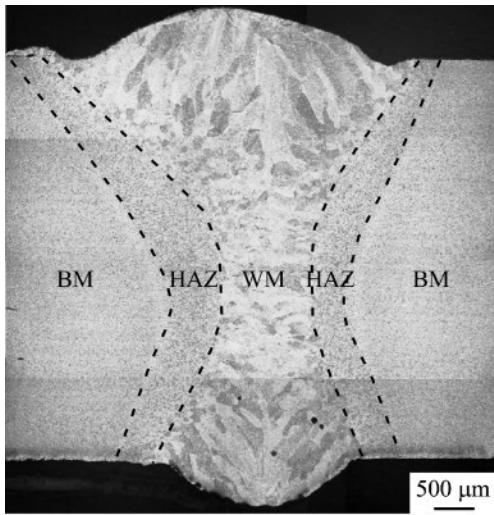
Macrostructure of fully-penetrated welded joint of 5 mm thick Ti-6Al-4V titanium alloy by single-pass hybrid welding at 10 kW, 3 m/min, 200 A and  $f_d=0$  mm.
